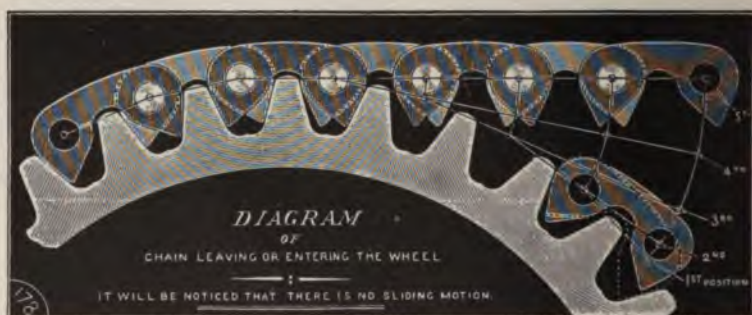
RENOLD SILENT CHAIN GEAR.
